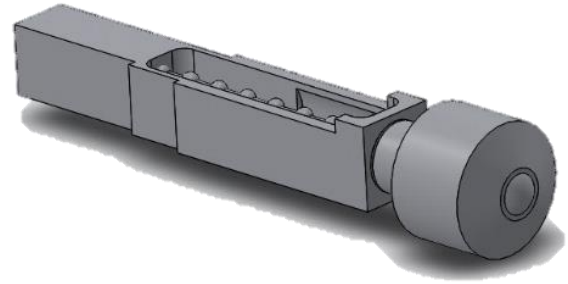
The ball burnishing equipment (Buldum and Cagan, 2017)
